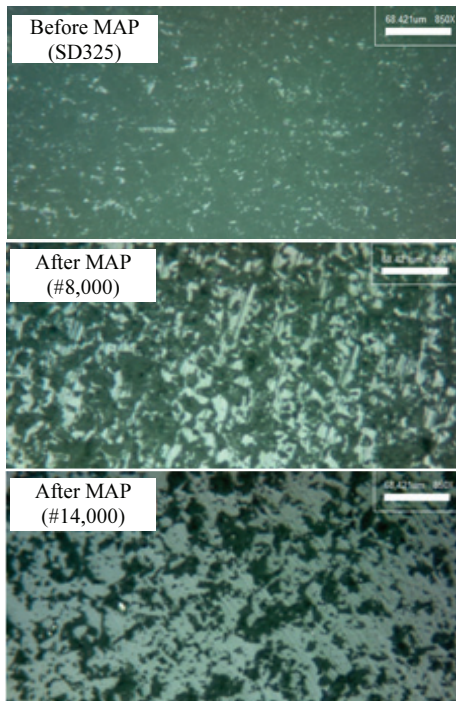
Comparison of the surfaces before and after magnetic assisted polishing for ELID ground workpiece using grinding wheel of grit no. 325
